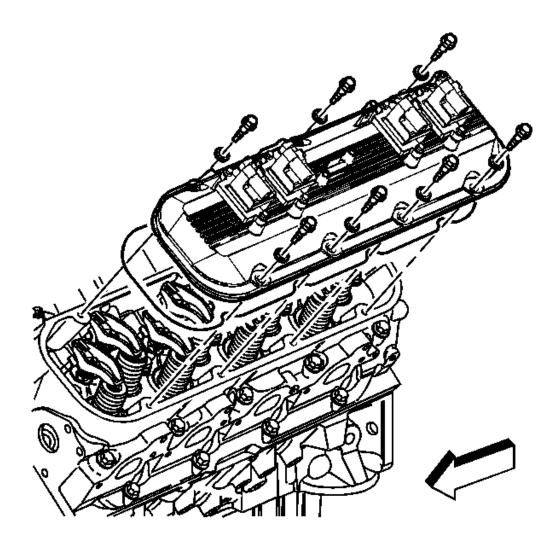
View Of Valve Rocker Arm Cover (Left) Courtesy of GENERAL MOTORS CORP.
